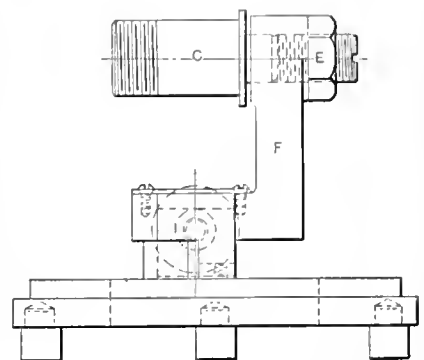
End View of Formed Fluting Cutter Grinding Device.
